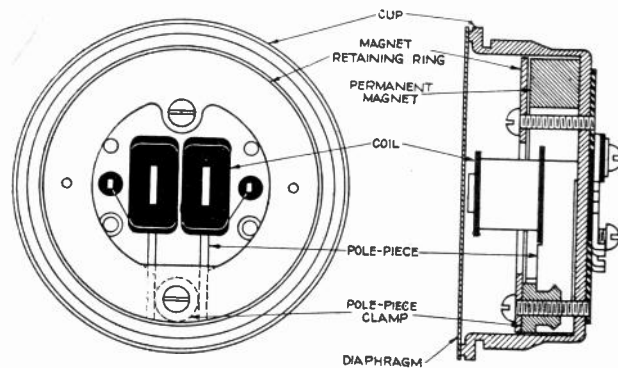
Sectional view and front view of watch case receiver, such as used on telephone operators' head sets.
